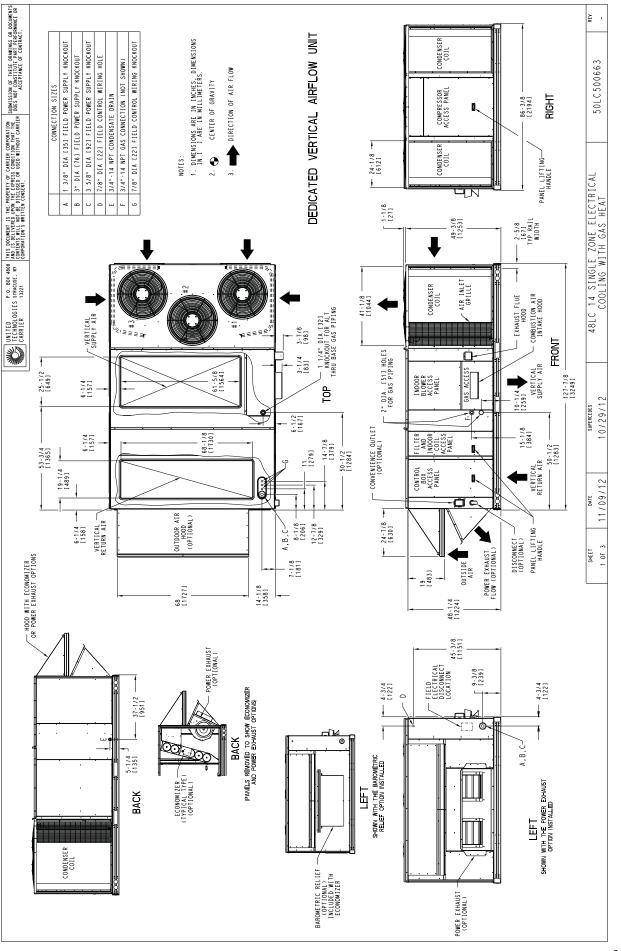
Unit Dimensional Drawing - 14 Size Unit, Sheet 1 of 3
